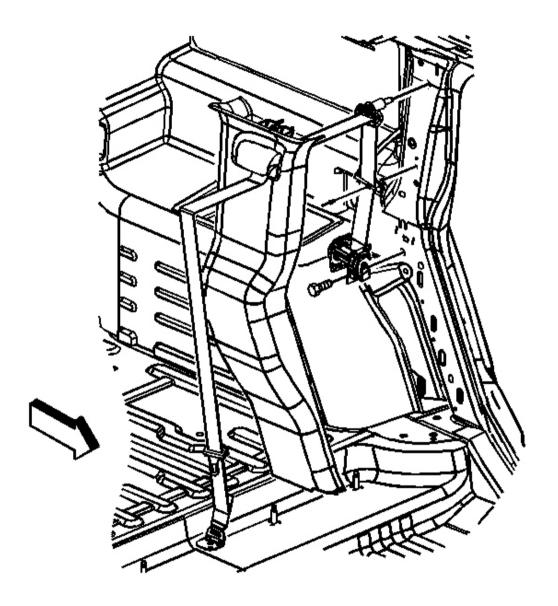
Upper Guide Bolt Courtesy of GENERAL MOTORS CORP.
